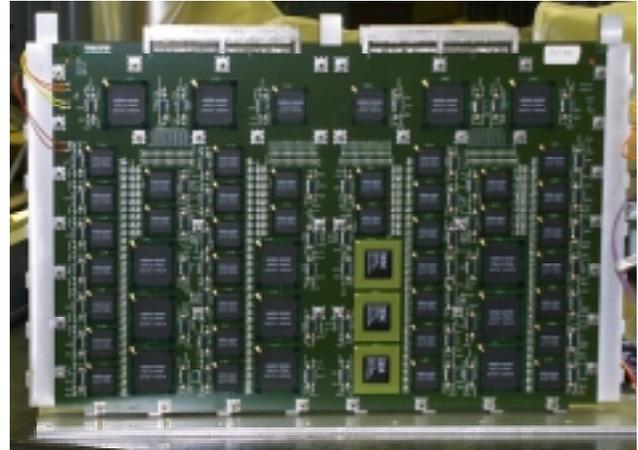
HDI Board; 108 Back-to-Back PBGAs
